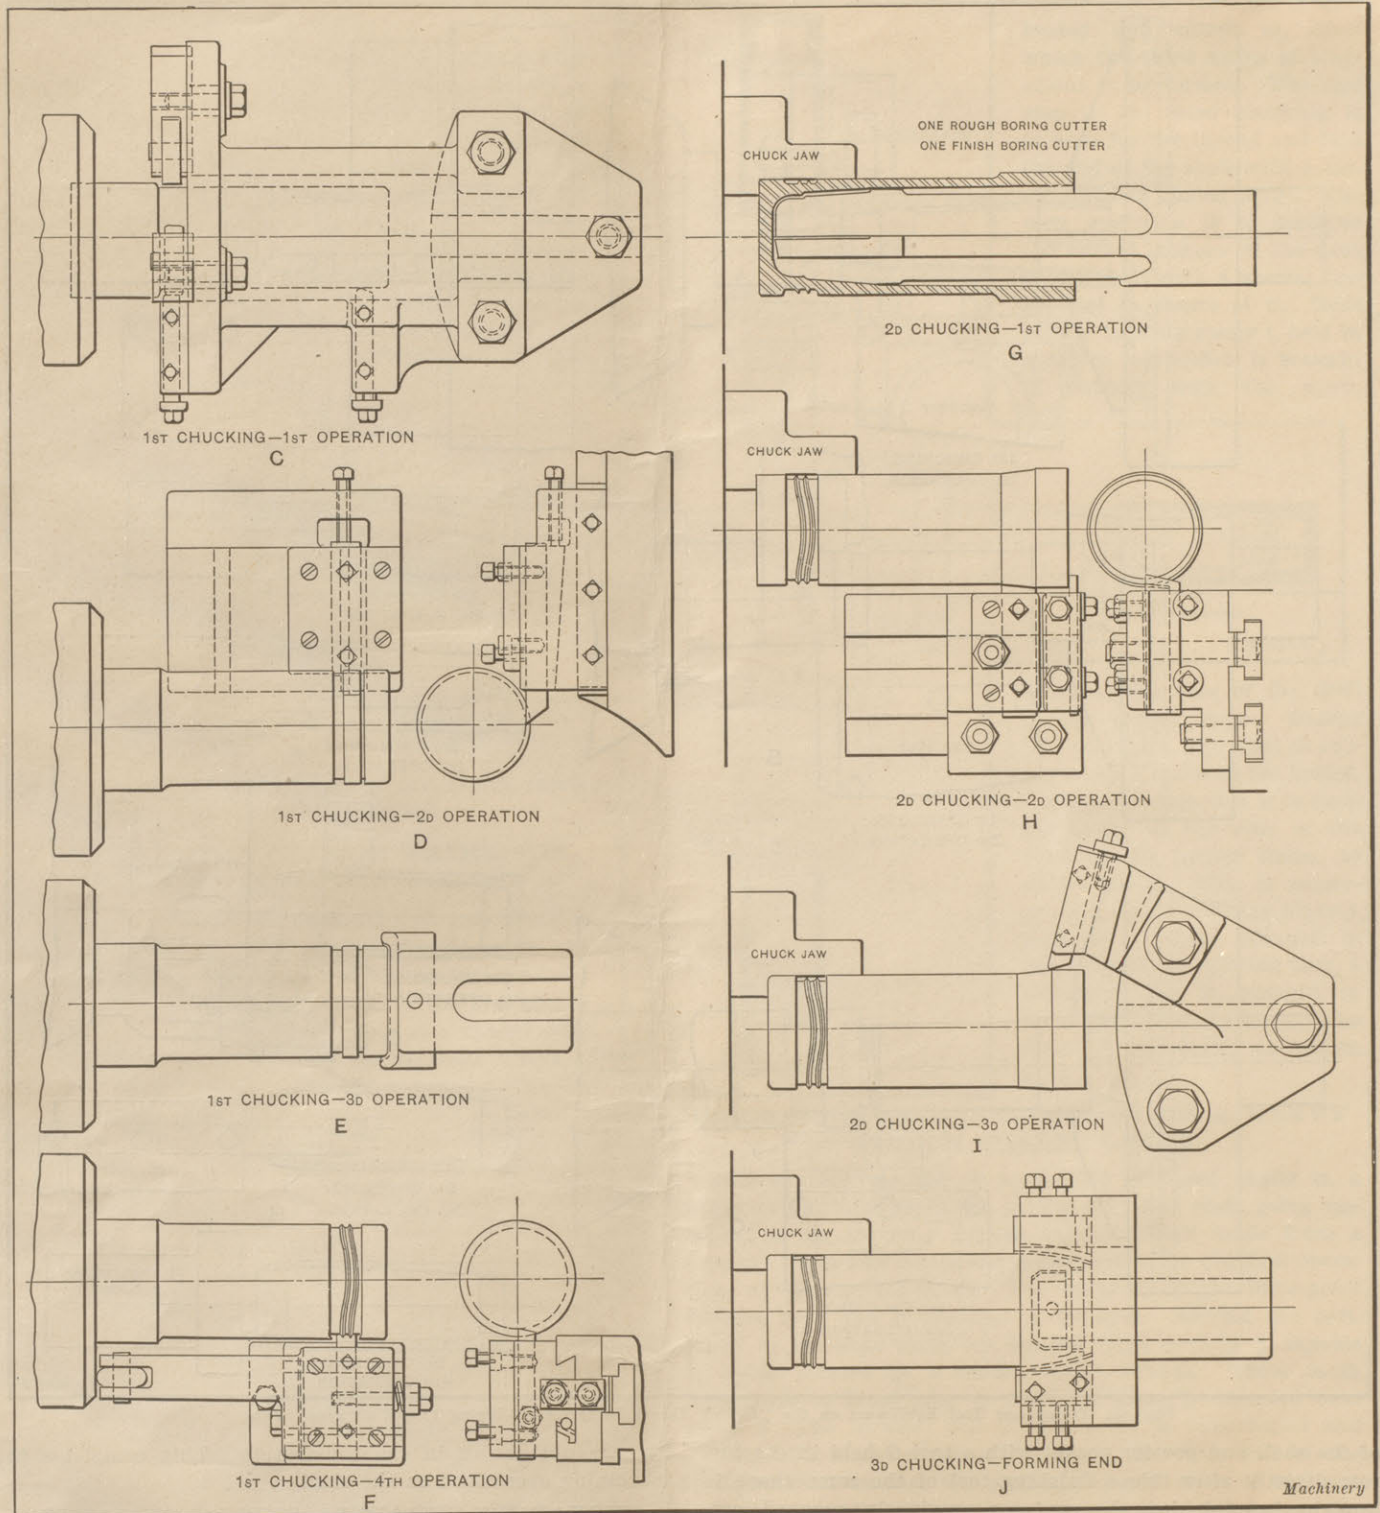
Machining Shrapnel Shell Forgings on a 22-inch Extra-heavy Turret Lathe
